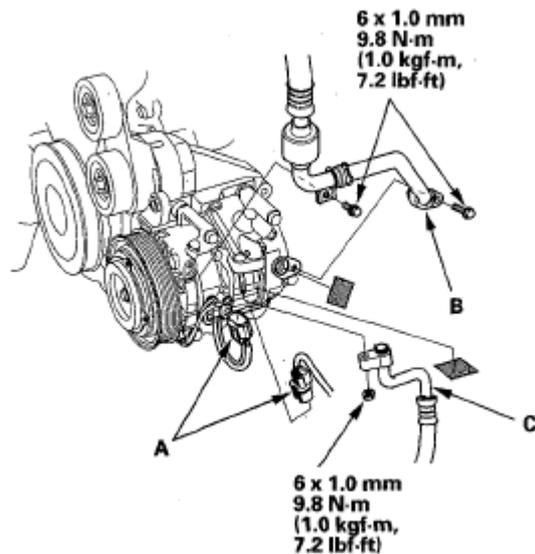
Identifying A/C Compressor Clutch Connector, Suction Hose And Discharge Hose With Torque Specifications
